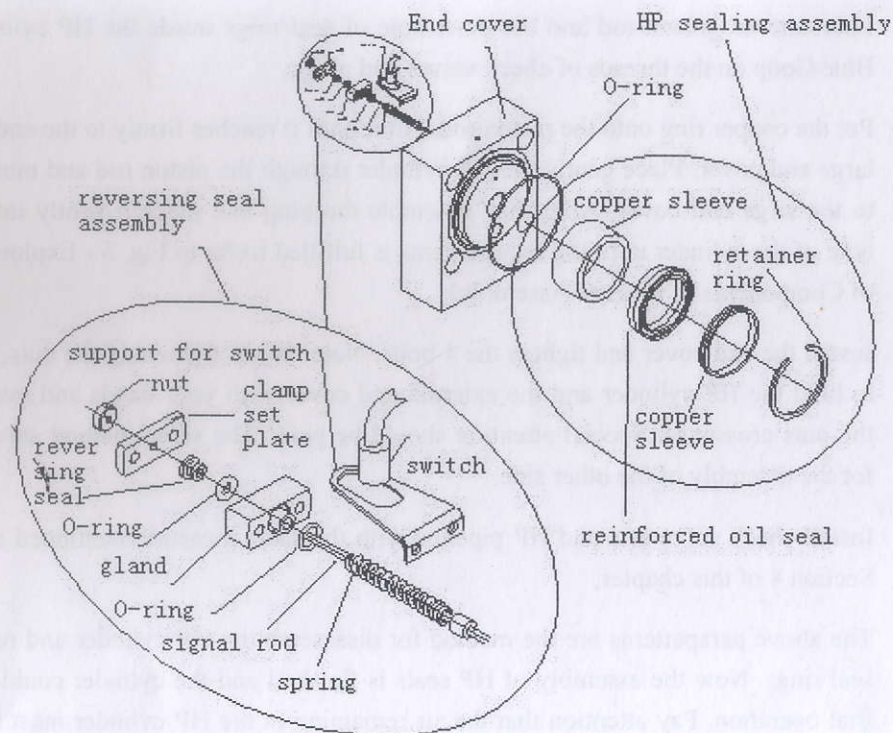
Exploded Diagram of End Cover Seal and Reversing System of Oil Cylinder
